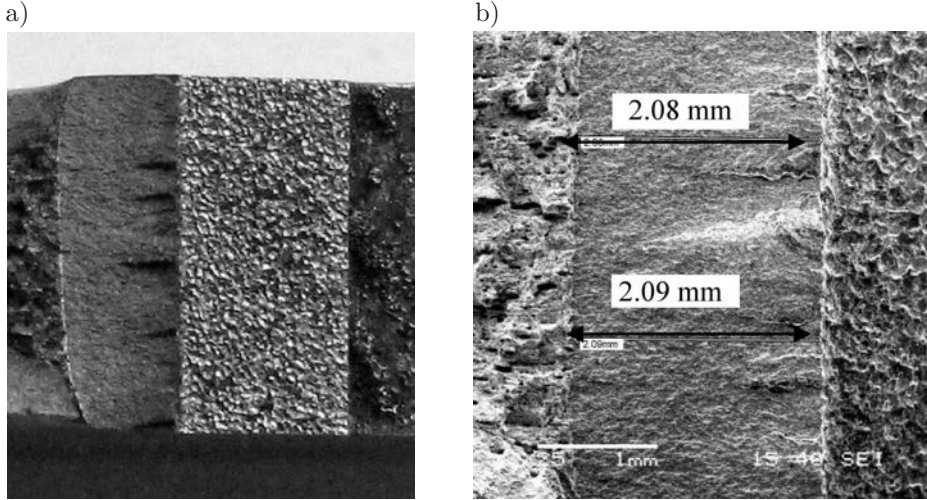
Fracture surface of the 40H steel after fracture toughness testing: a) fatigue zone in macro scale, b) fatigue zone in micro scale (magnification $25\times$).
